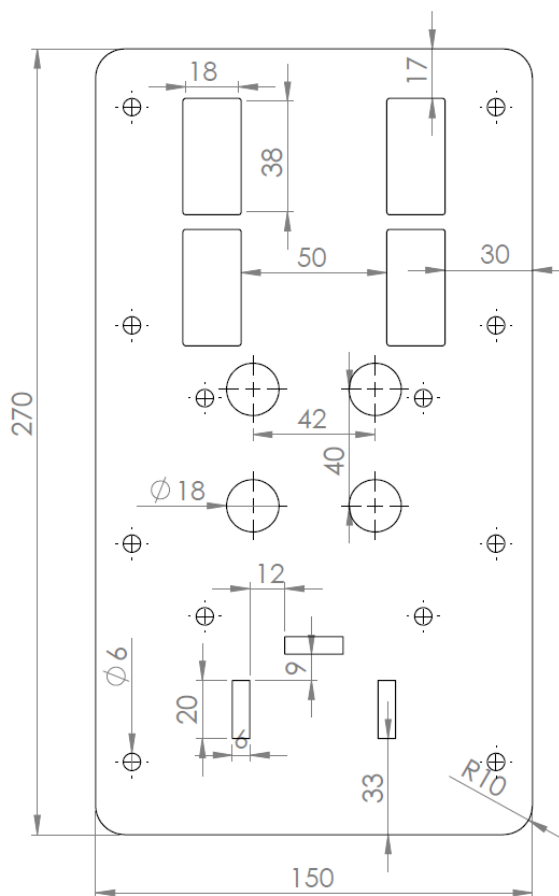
Drawing of the bottom acrylic baseplate. Dimensions are in millimetres. Thickness of the part is 6 mm.
